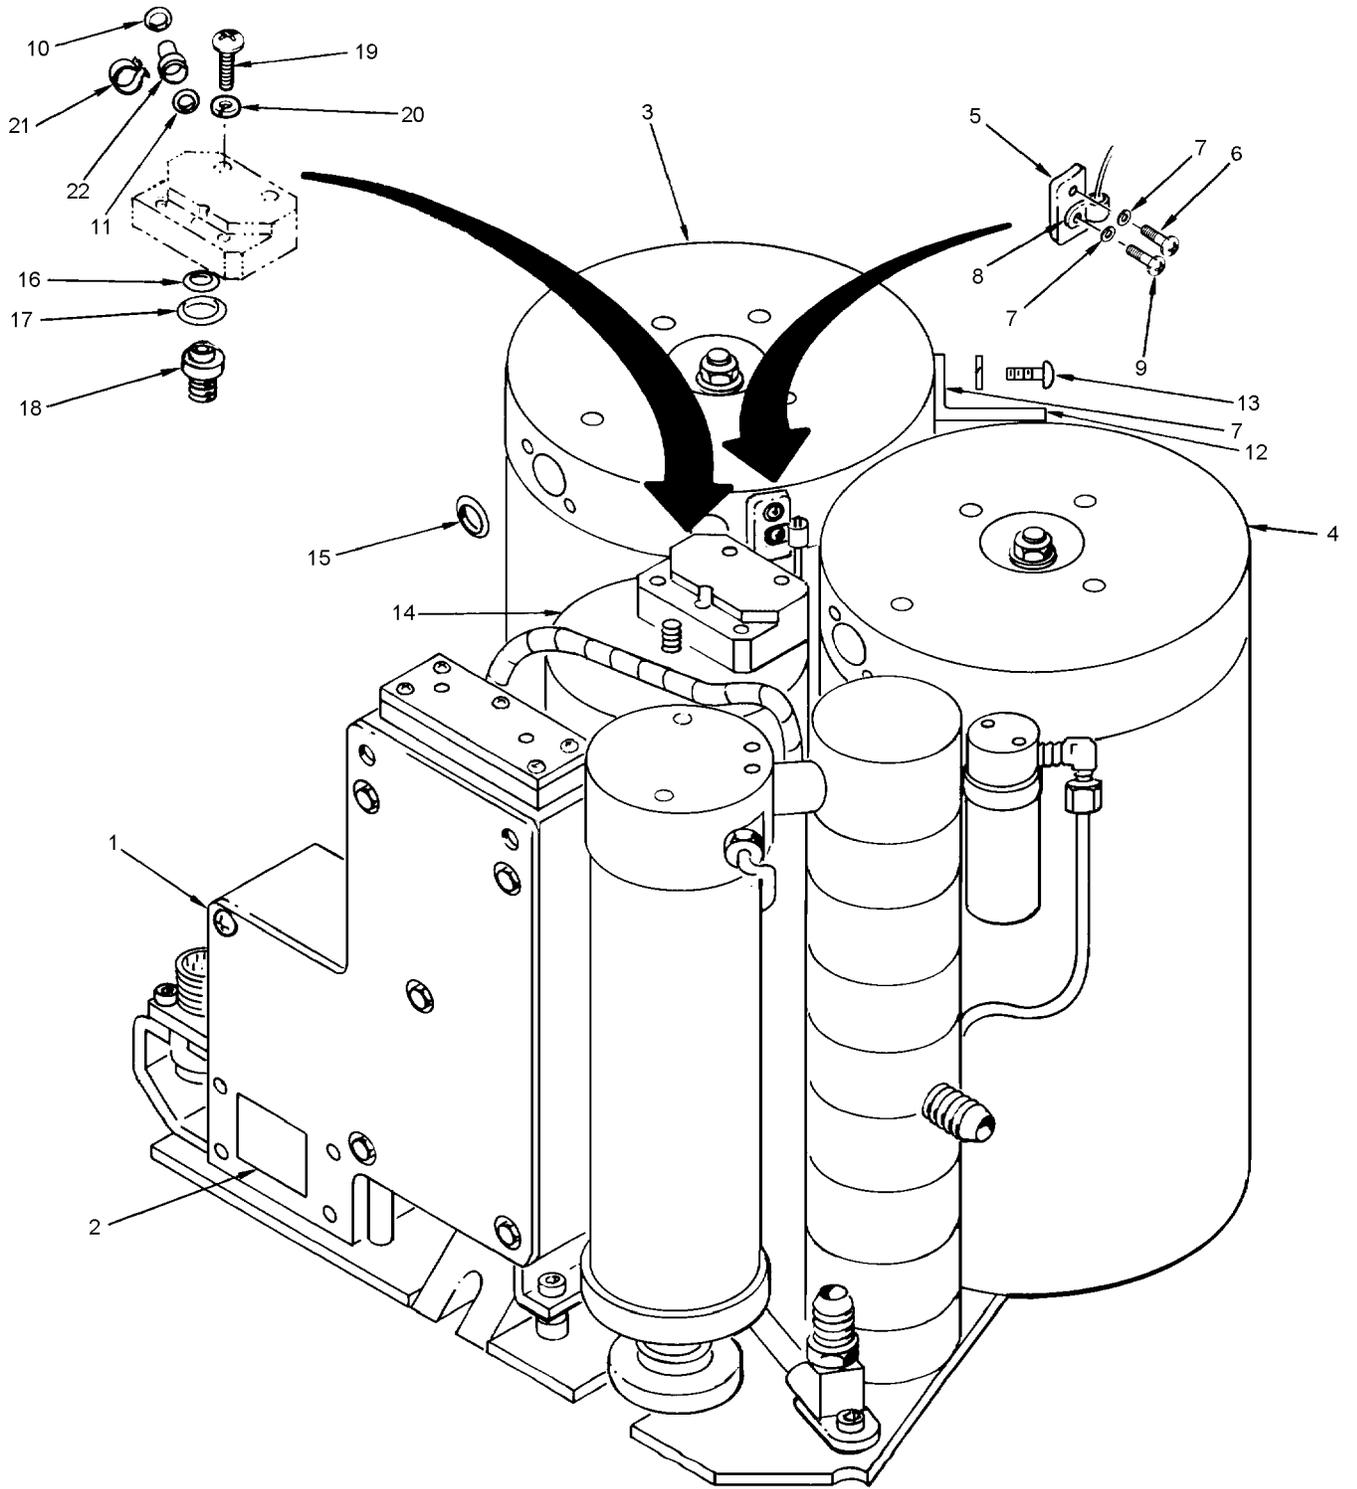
Electronics Box Assembly, Sieve Beds and Plenum Assembly with Check Valves
